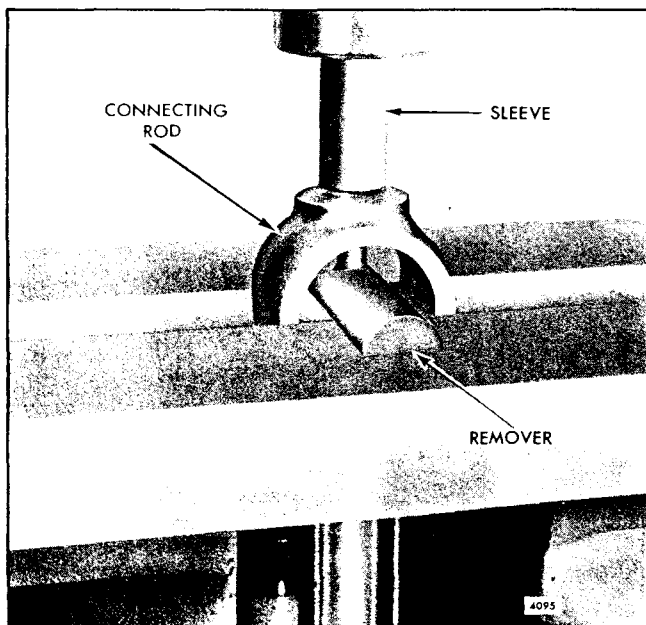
Removing Spray Nozzle from Connecting Rod
